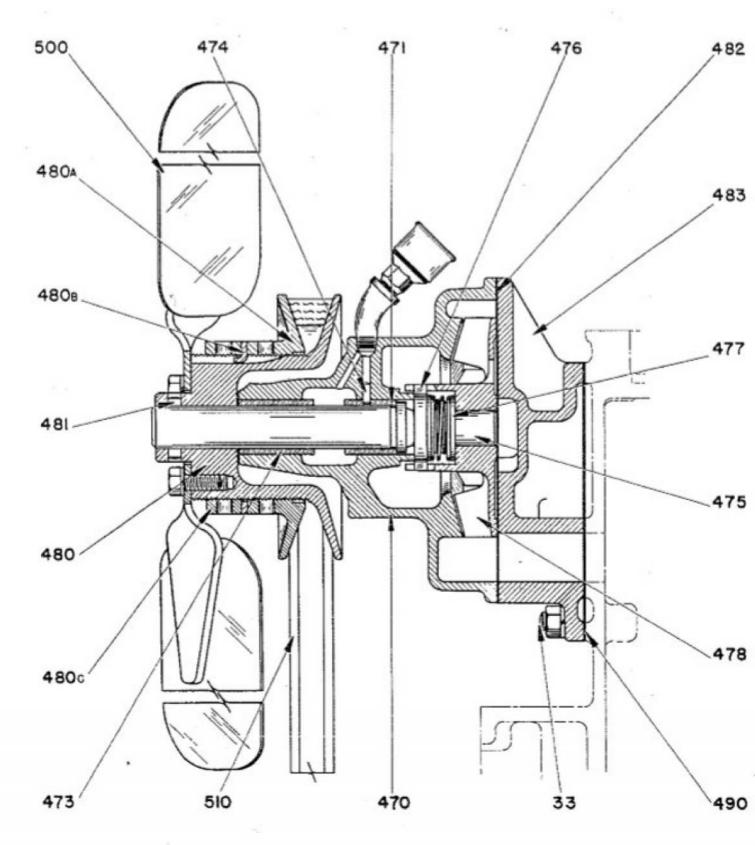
Cross Section through Water Pump (Serial No. 165843 and up)
